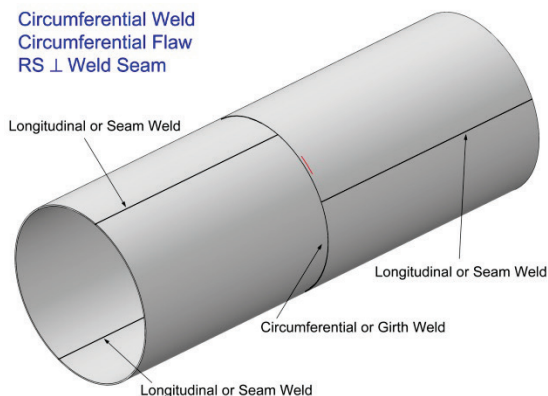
CASE 3: CIRCUMFERENTIAL CRACK PARALLEL TO A CIRCUMFERENTIAL WELD - RESIDUAL STRESS PERPENDICULAR TO THE CIRCUMFERENTIAL WELD WITH A DOUBLE-V NOTCH
